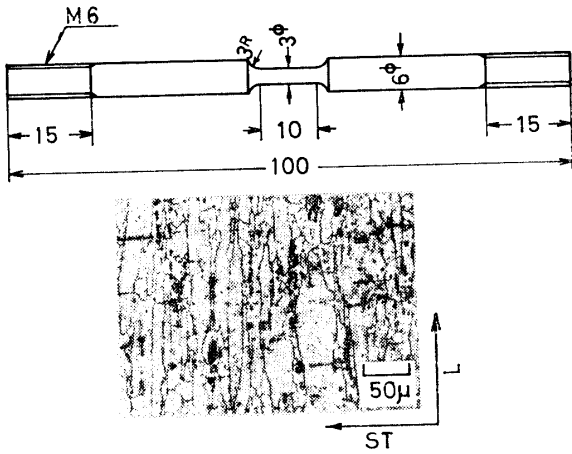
Dimensions and microstructure of tensile specimen, machined out in short-transverse direction
